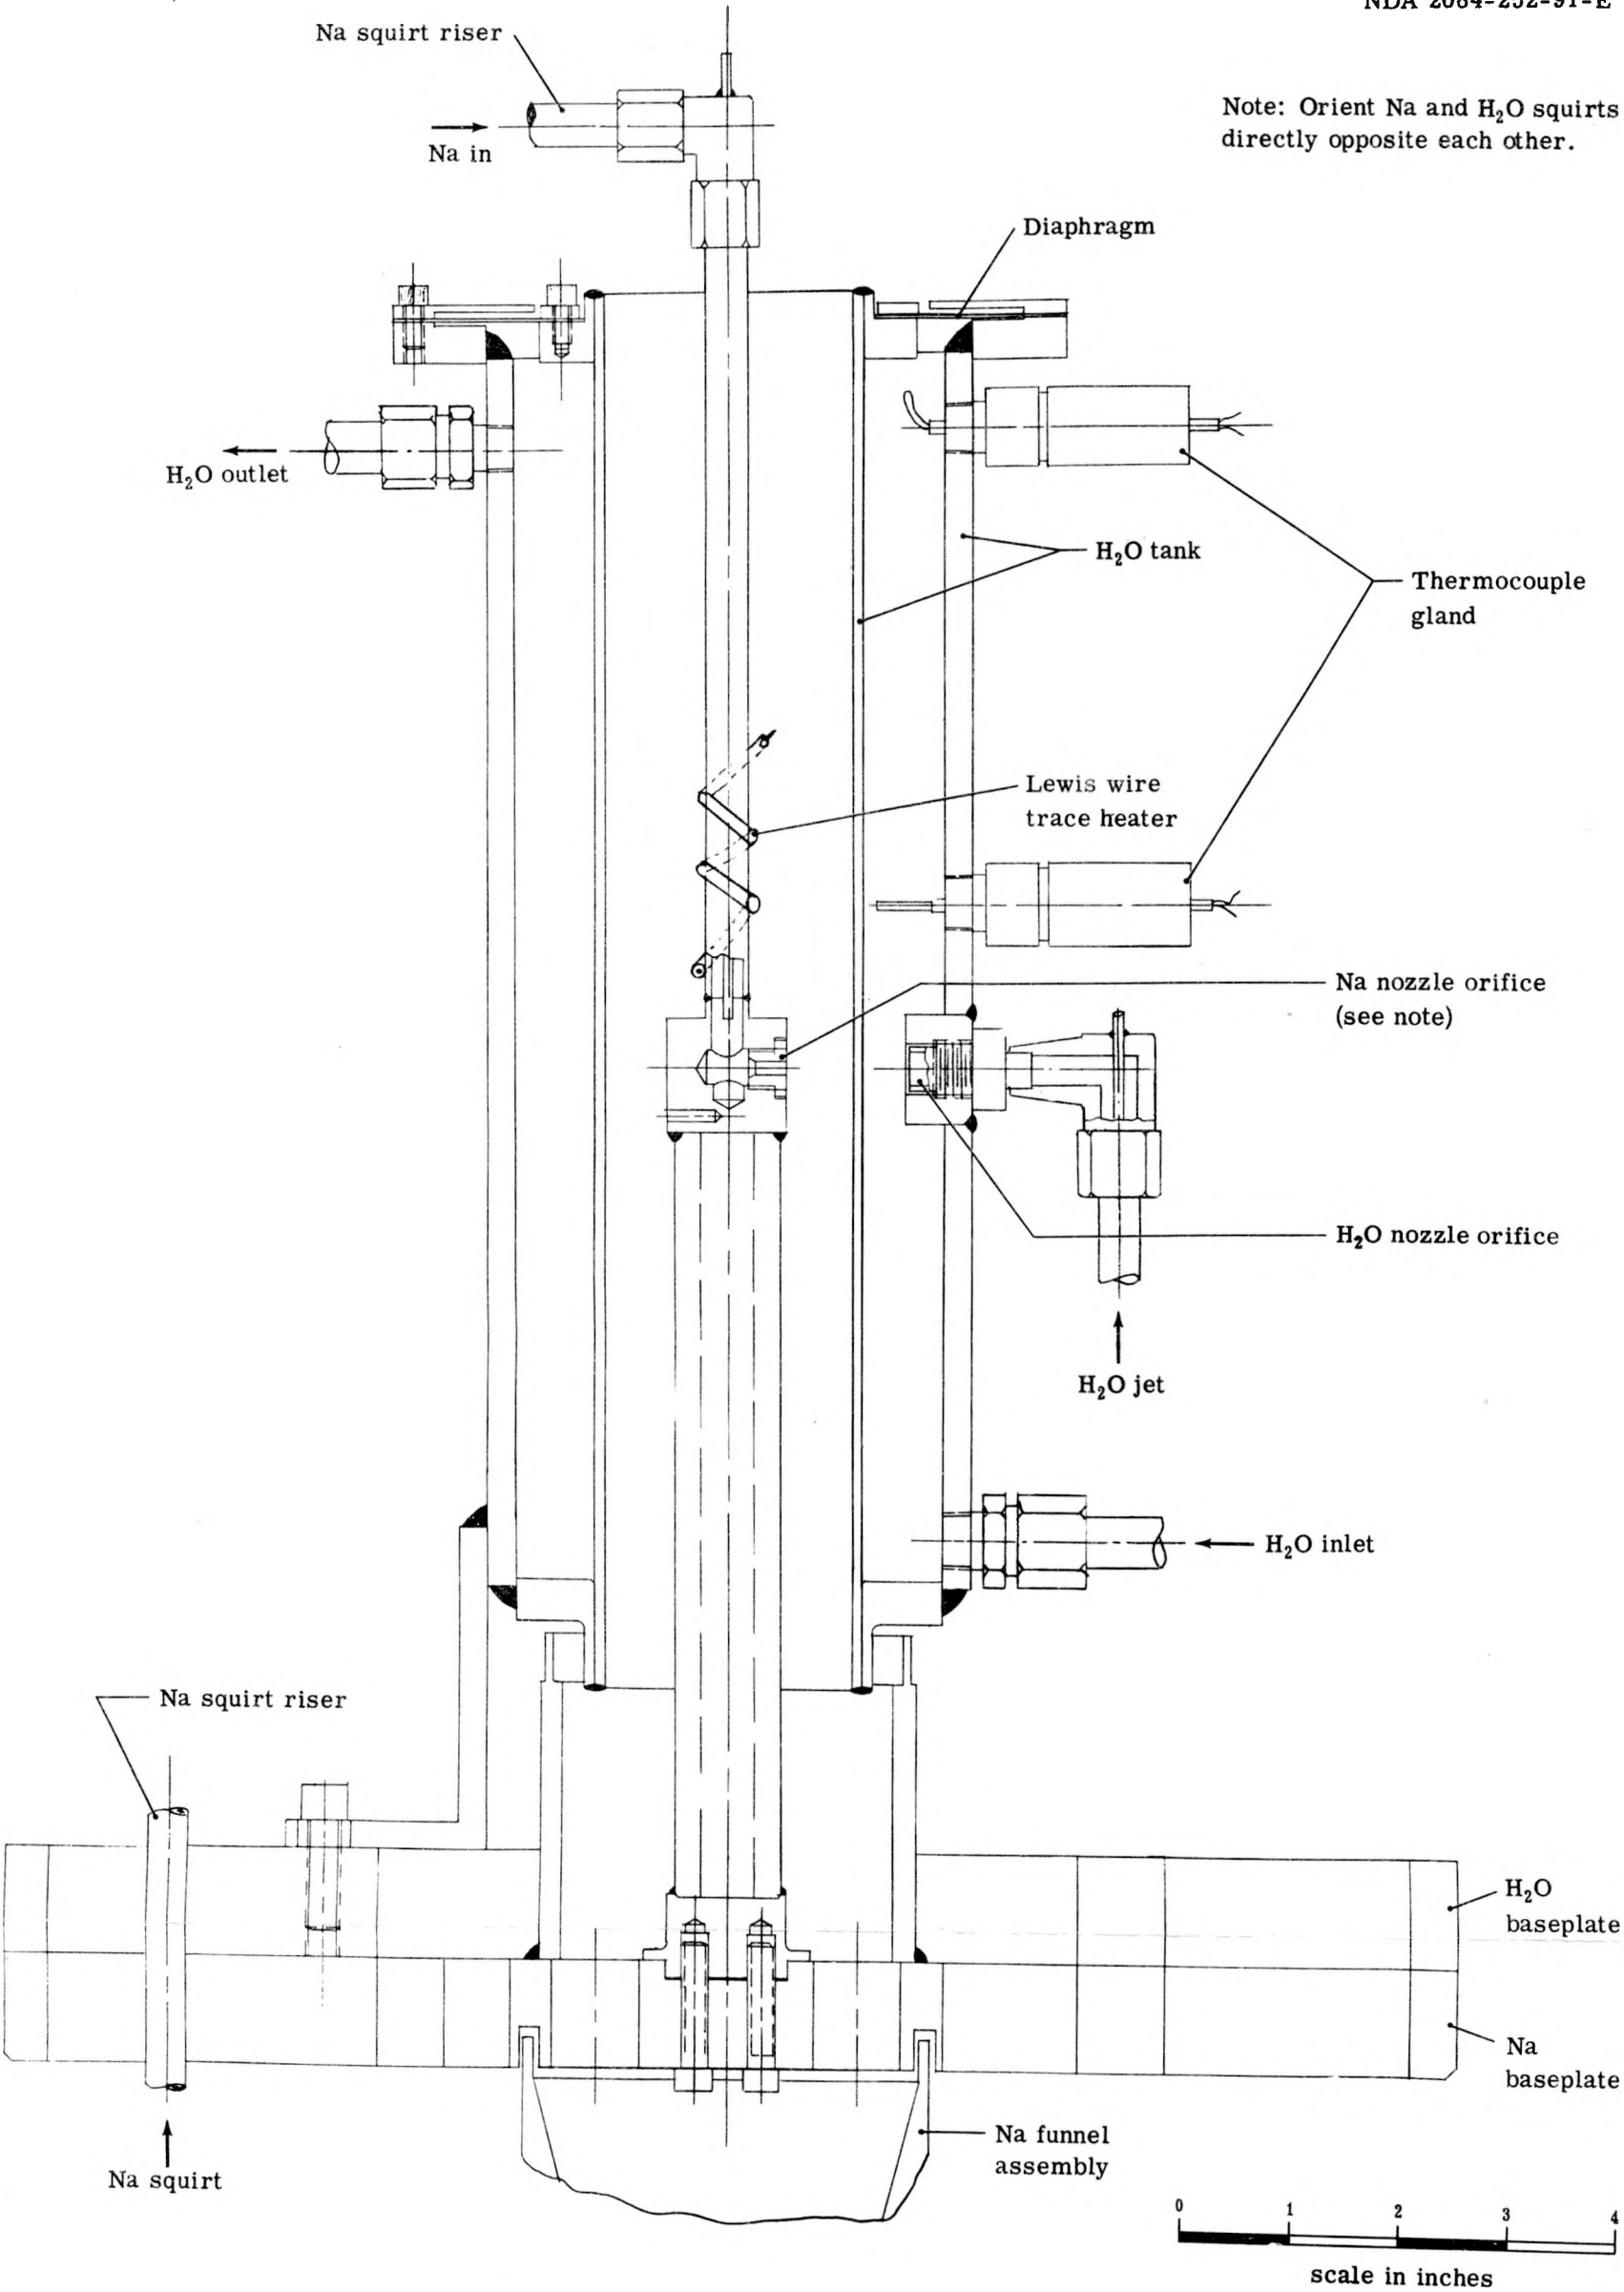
SDR — multiple failure test section — sodium squirt on water — layout
